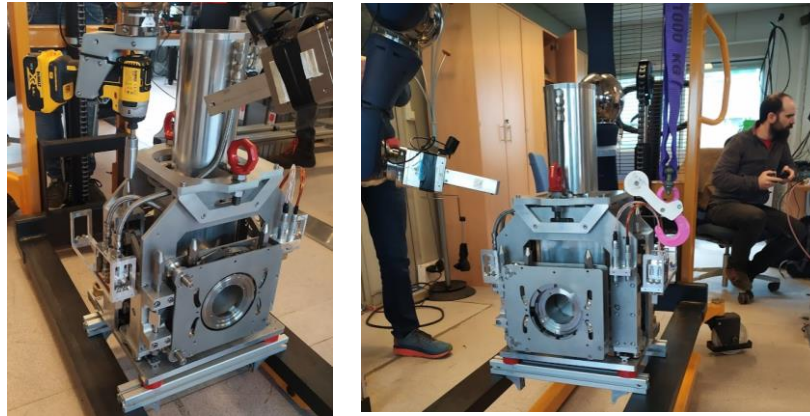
Left: All-metal gate sector valve prototype belonging to the vacuum module assembly (VAX) for the IP side of the TAXS. Right: The valves will be remotely disconnected in case of exchange.
